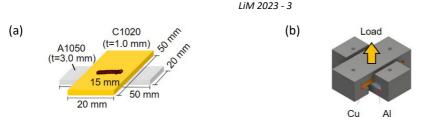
Setup of specimens for cross tension test. (a) size of specimens; (b) clamping jig and loading direction
